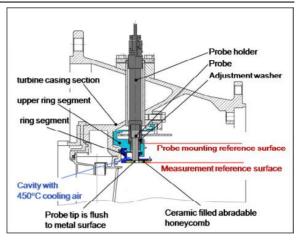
Drawing of the microwave high temperature probe holder design and its mounting on the DM80 engine port. The probe mounting is referenced to the upper ring segment while the blade tip clearance zero is the surface of the ring segment
